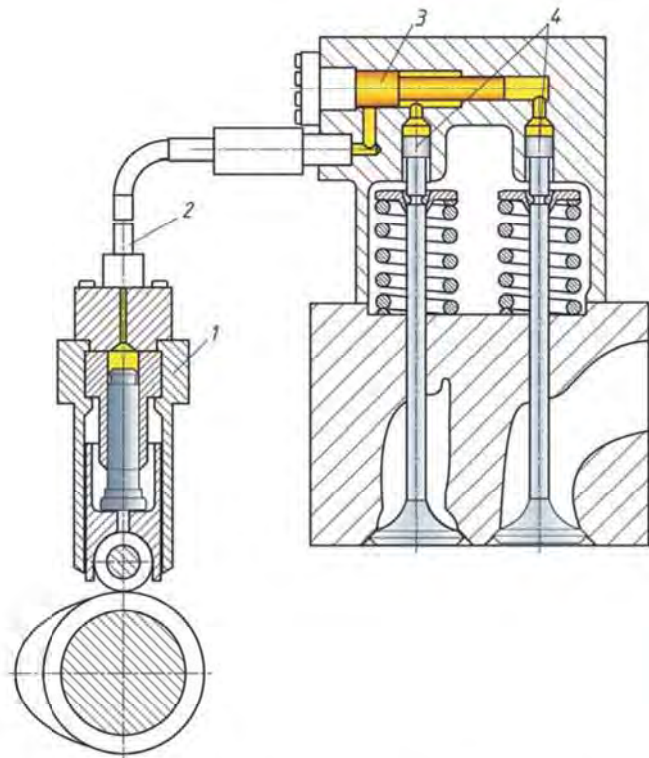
Diagram of the gas distribution mechanism with hydraulic valve drive of the Sulzer ZA50S engine: 1 – actuator, 2 – high-pressure oil line; 3 – oil filter; 4 – valve drive pistons (adapted from [6])
